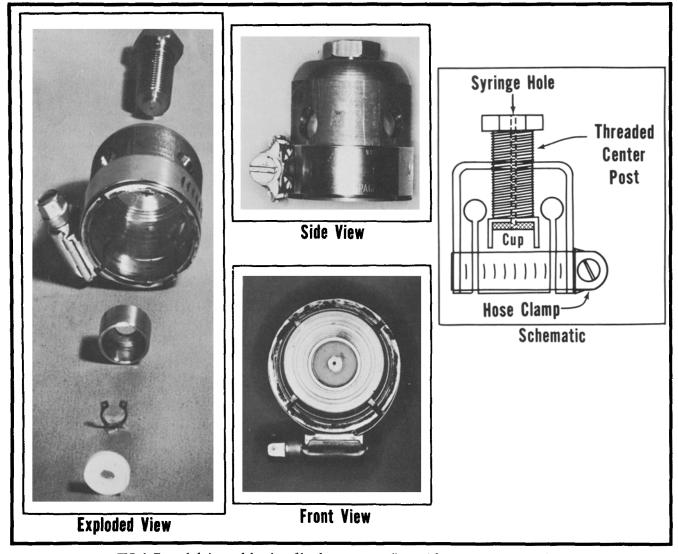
Expanded view and drawing of headspace gas sampling tool for use on screw cap seals.
